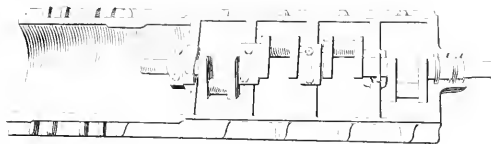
ARRANGEMENT OF CRANKSHAFT BEARINGS AND BASE COMPARTMENTS
